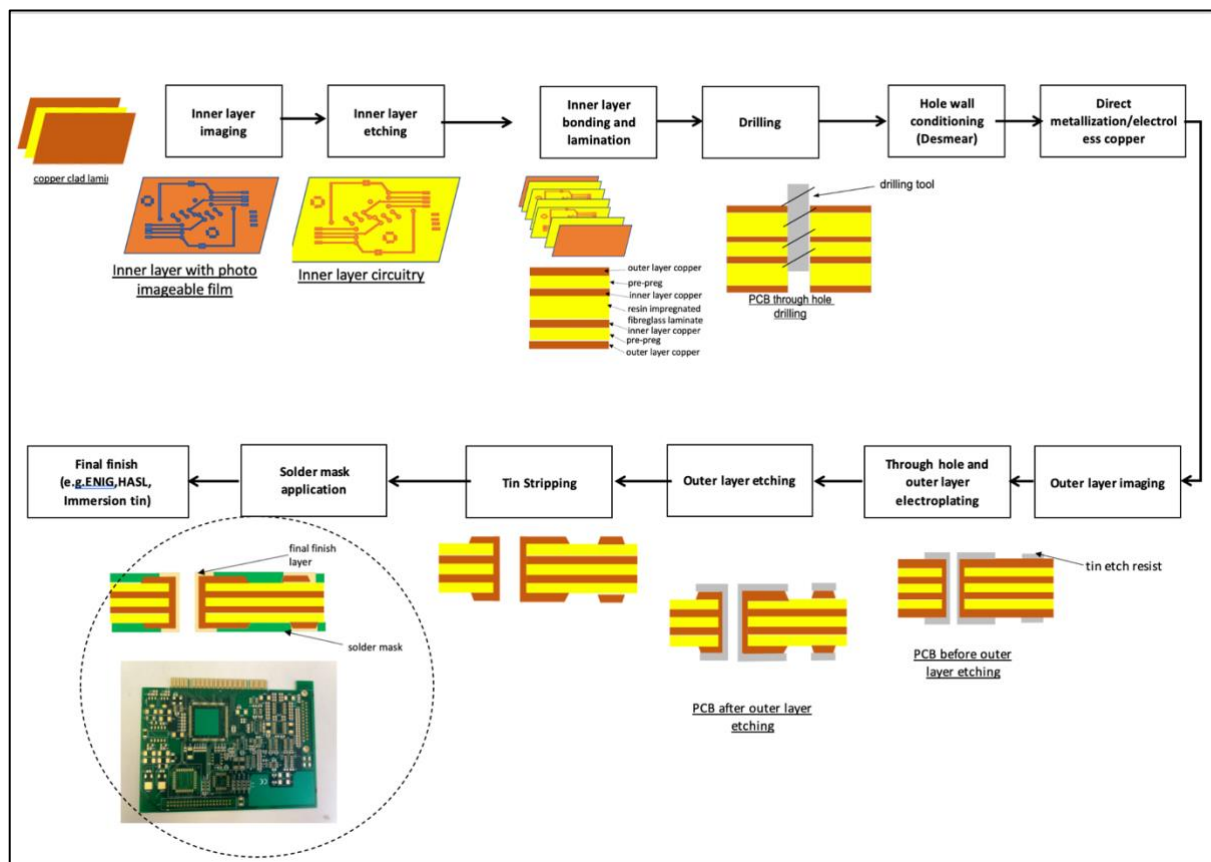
Typical PCB manufacturing process flowsheet for multilayer PCBs
